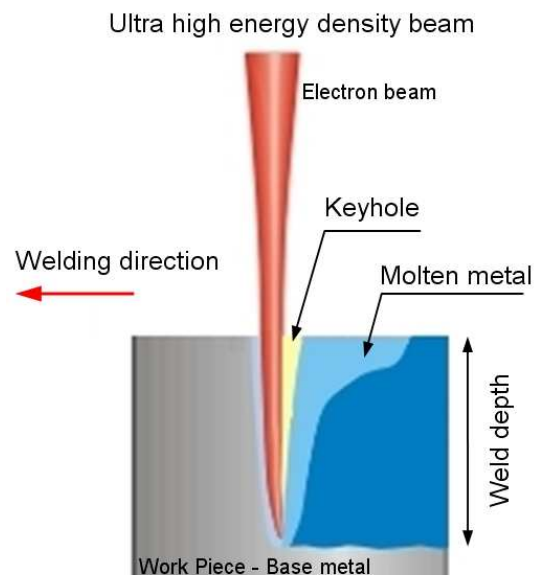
Schematic illustration of the Electron beam welding process
